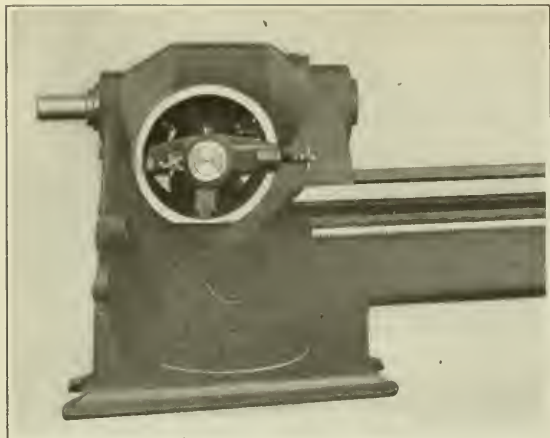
Opposite Side of Boring Equipment shown in Fig. 4—Attention is directed to Star-feeds for Boring and Facing Tools
